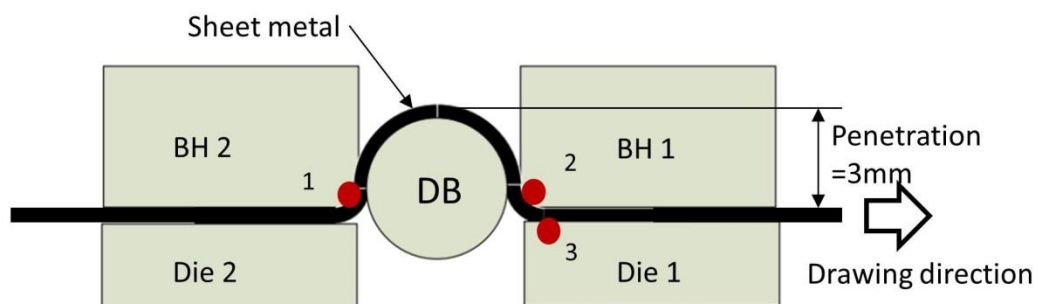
Draw bead geometry for strip drawing tests (BH=blank holder; DB=Draw bead)
